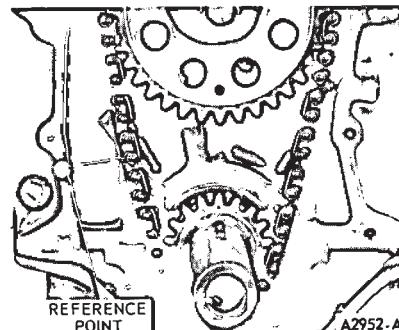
Checking Timing Chain Deflection—V-8 Engine
